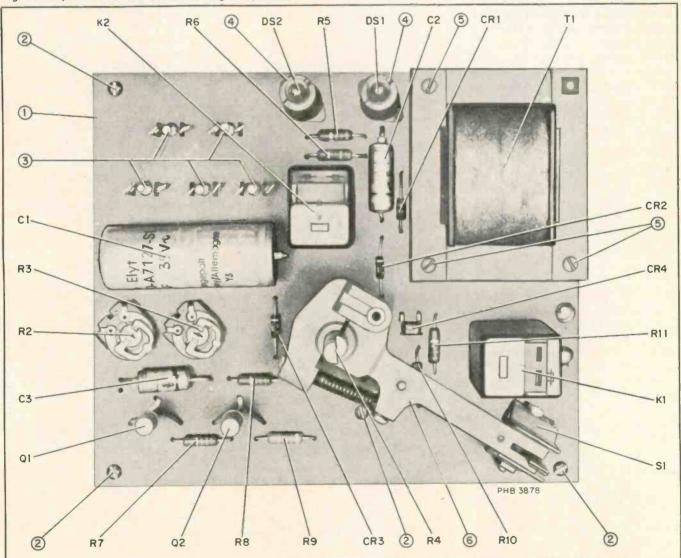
Internal view of 10W707 shows circuit board and ac power cord lead dress. Fig. 18-Top view of circuit board showing components.
